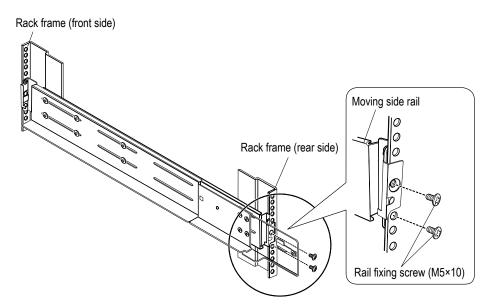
Removing Drive Box (2U) Installation Rails (for Circular Hole) - 1
